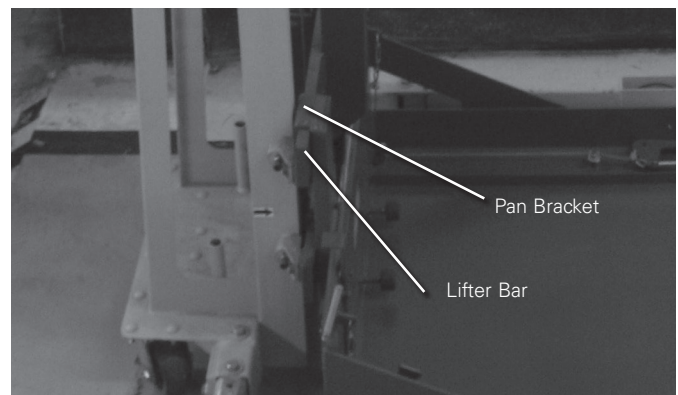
Correct Connection of Lifter Bar to Pan Bracket.
